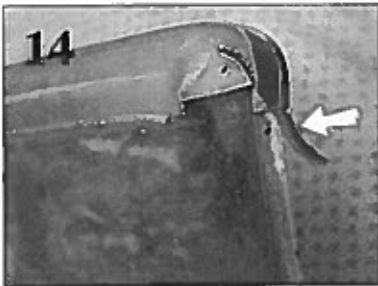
Slide the aluminum trim pieces onto the shell using a $\frac{1}{4}$ " wide by $\frac{1}{8}$ " thick clay sealing strip. Photo 15: Make new wood pieces if your old ones are rotted or warped. The shape is rather complex, being both beveled and tapered. Photo 16: Insert the steel angle brackets when fitting the lower rear rail, and tighten using six screws on each.
